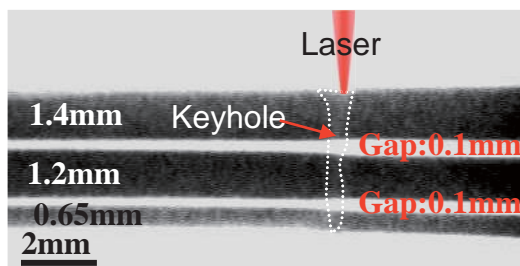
X-ray transmission observation result of keyhole during laser lap welding of 3 sheets with gaps of 0.1 and 0.1 mm at 4.5 kW laser power and 55 mm/s welding speed.
